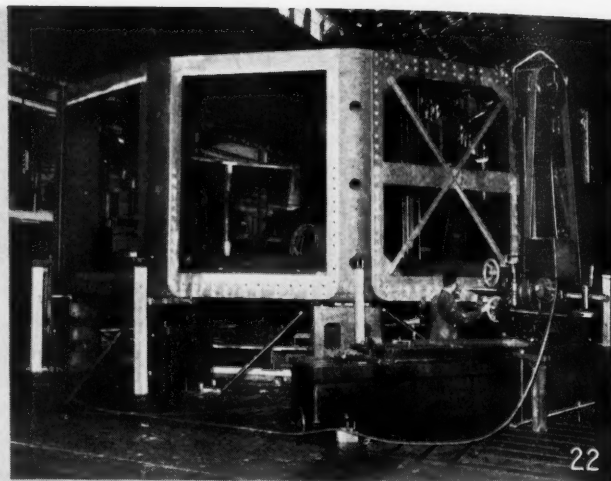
Machining the Faces of the Nose Liner Segments on a Large Size Horizontal Boring Machine. Fig. 22. Many Types of Machine Tools were Mounted Temporarily in Position for Finishing Operations on the Nose Liner. Fig. 23. Drilling and Tapping for the Monel Metal Seat on the Nose Liner.
